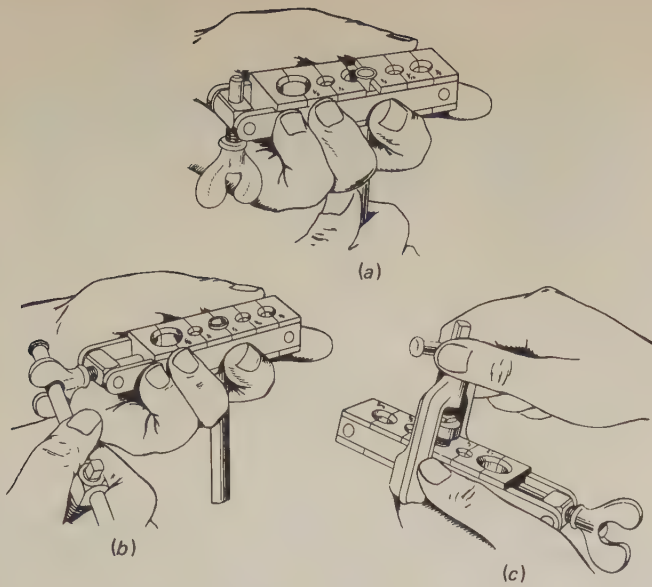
Using a flaring tool to flare the end of a tube. (Imperial Brass Manufacturing Company)
